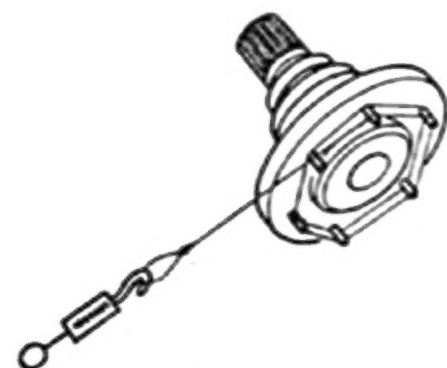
Use a cord and spring scale to check pounds pull needed to keep outer axle rotating in bearing assembly. Refer to text.
